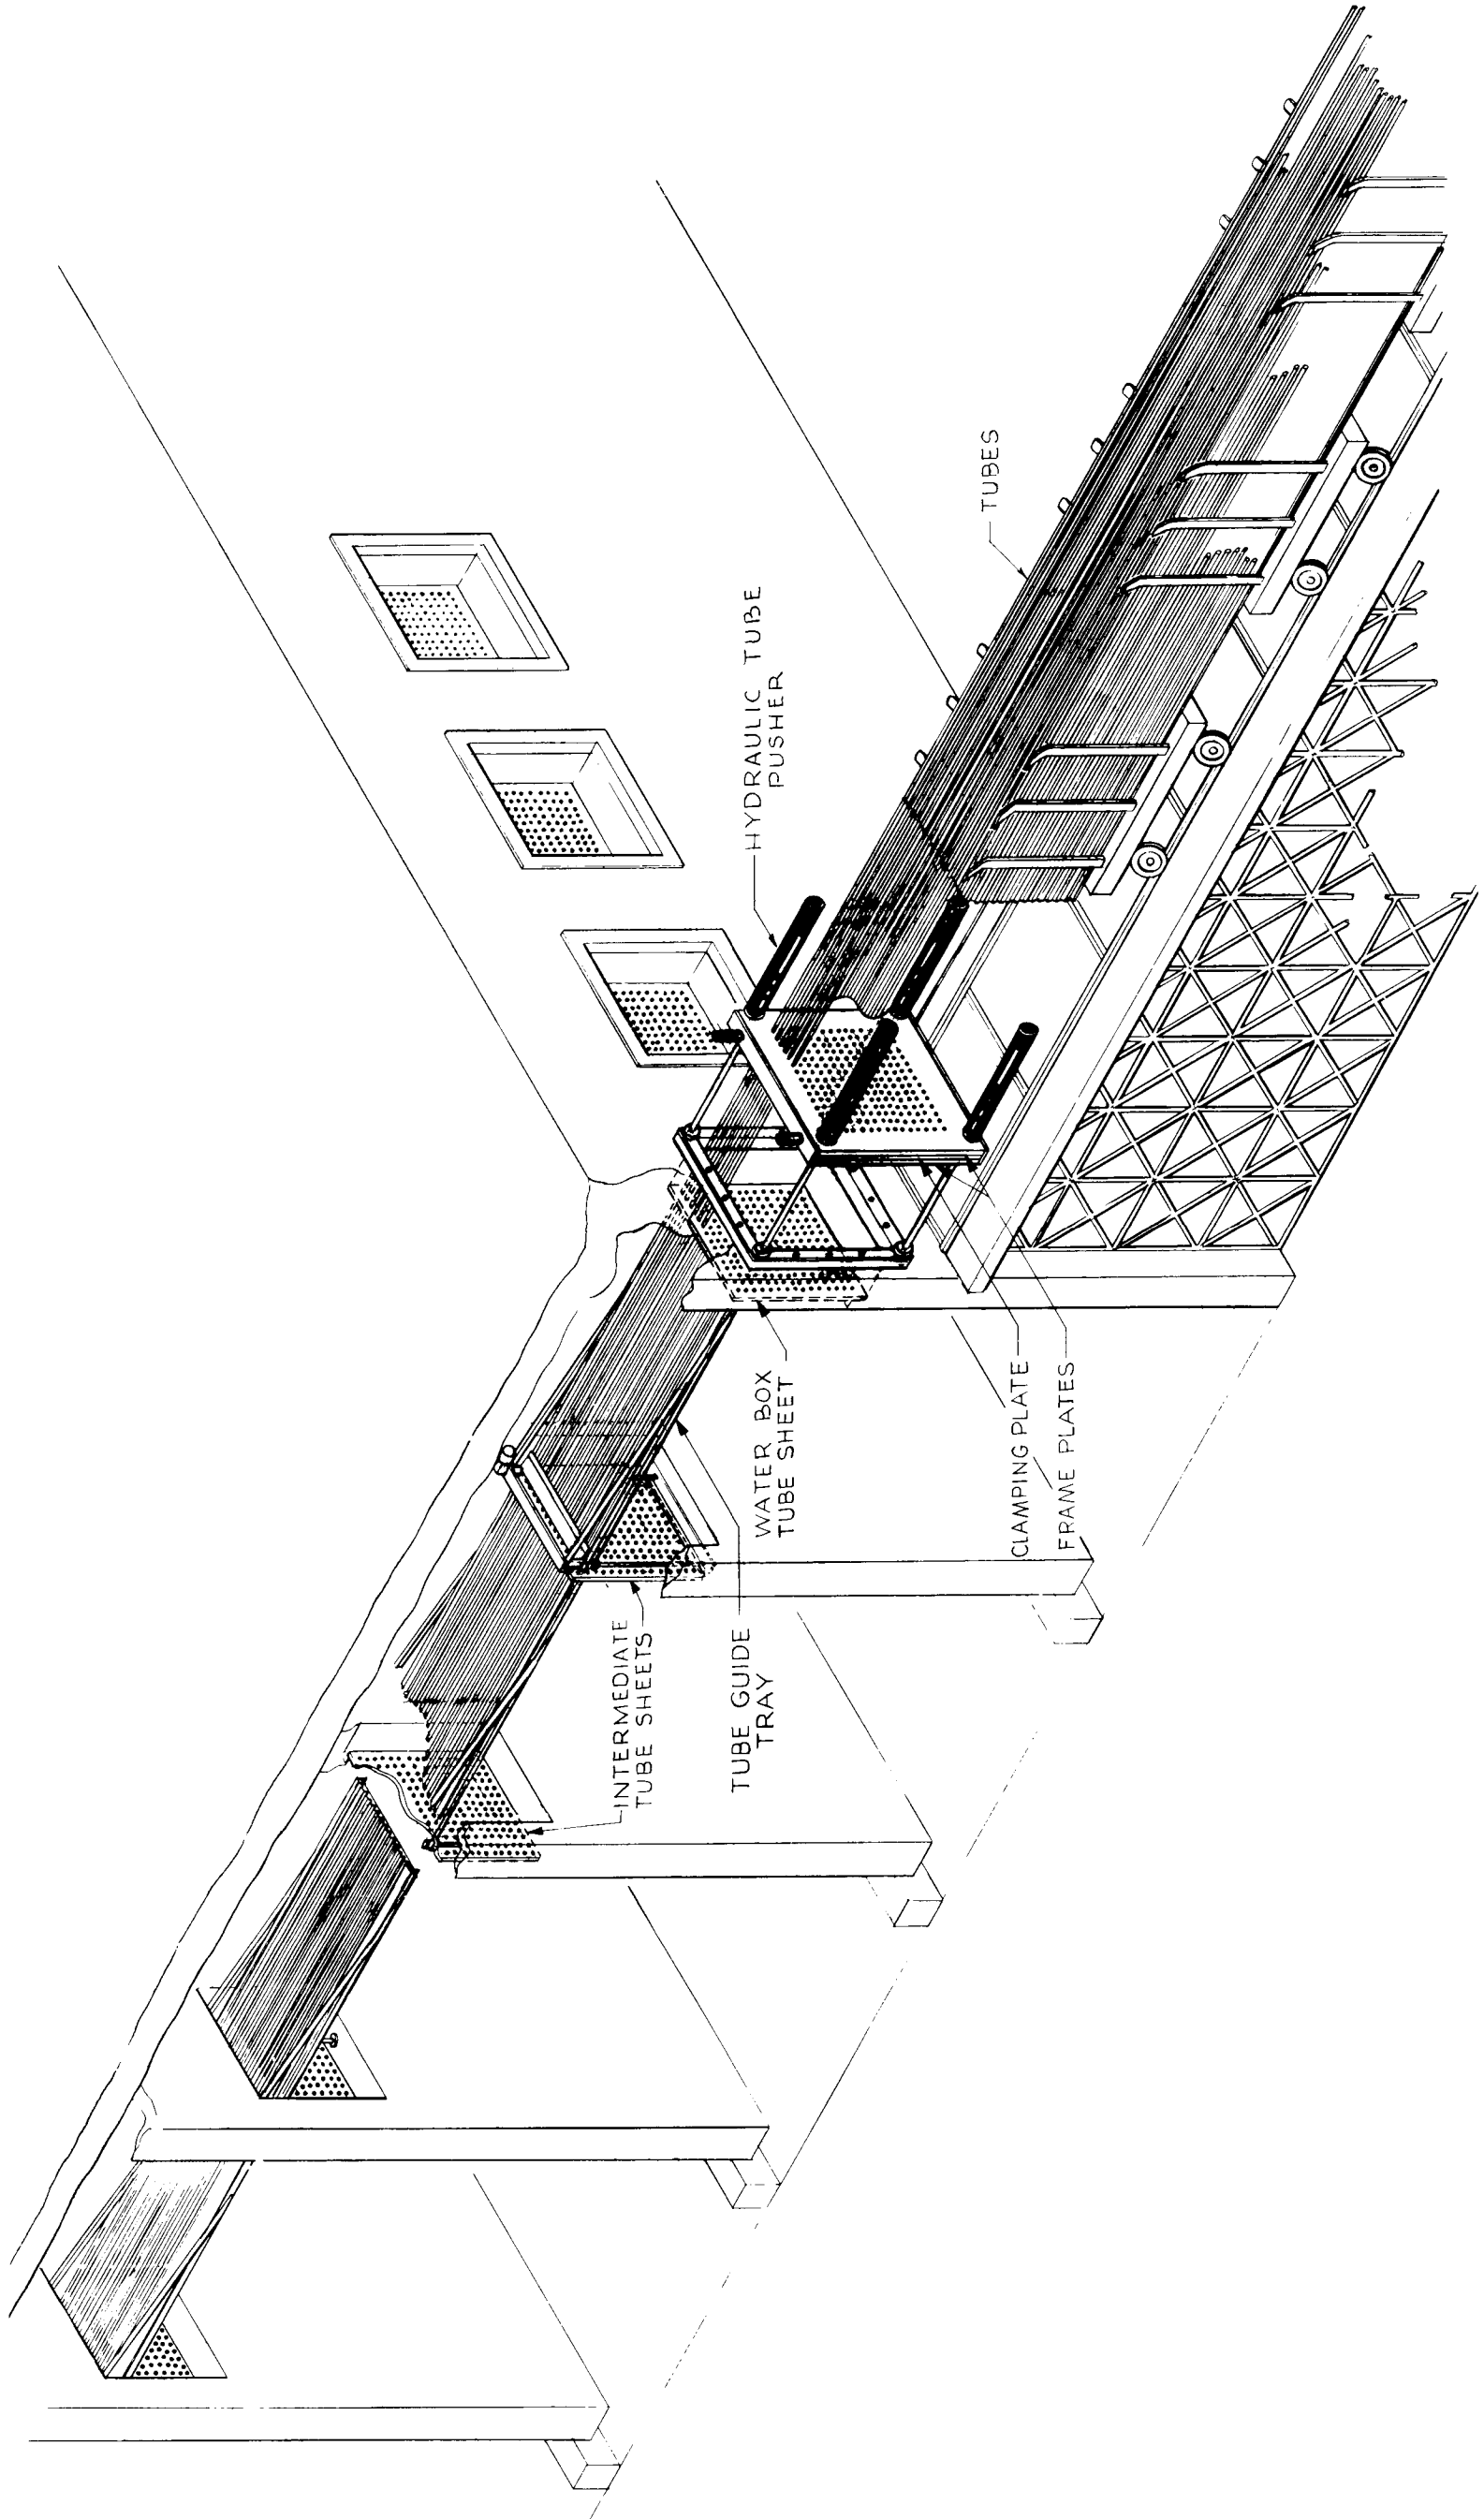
Insertion of Full-Length Tubes in Evaporator.
